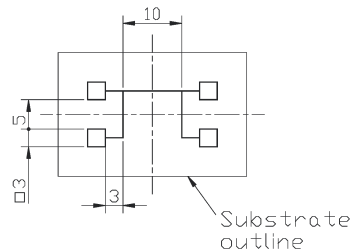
Dimensions of the test circuitry; all dimensions are displayed in millimetres
